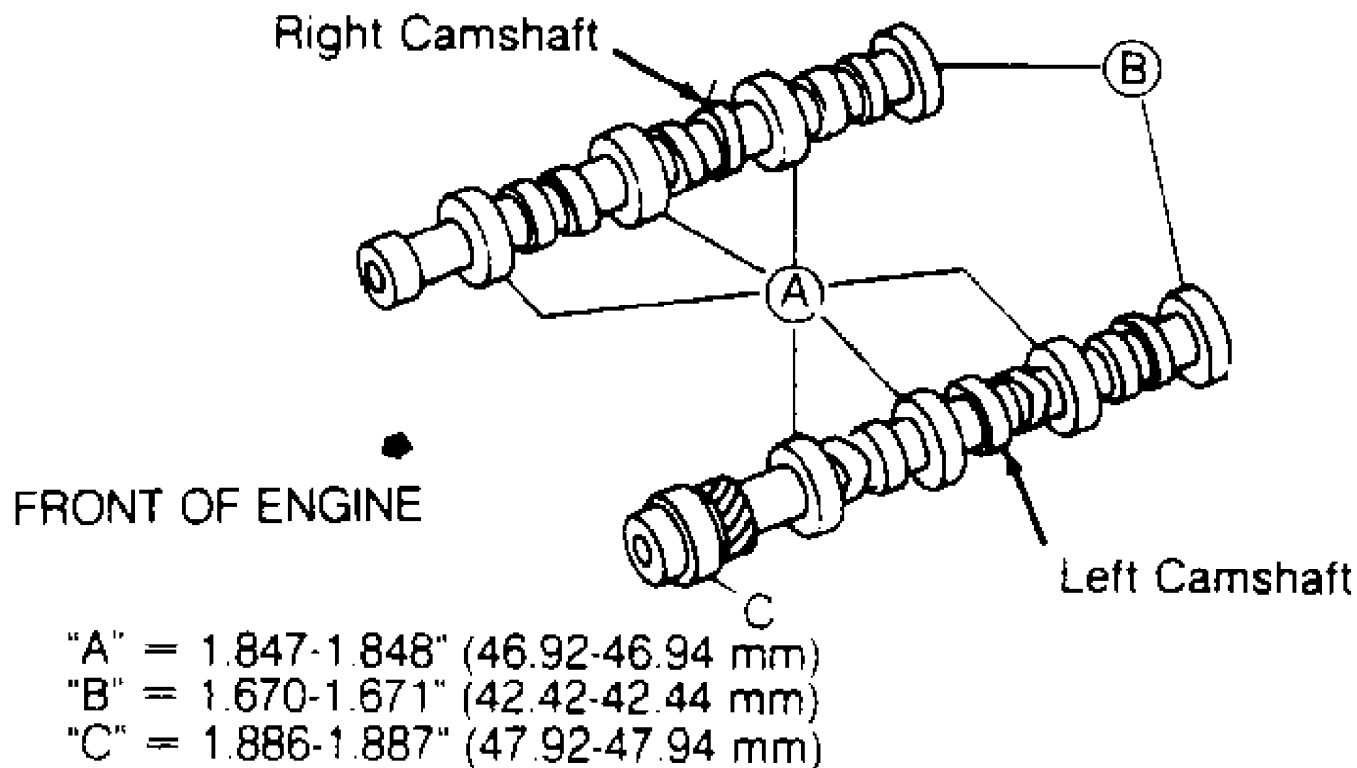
Measuring Camshaft Bearing Journals Maxima, Pathfinder & P/U
